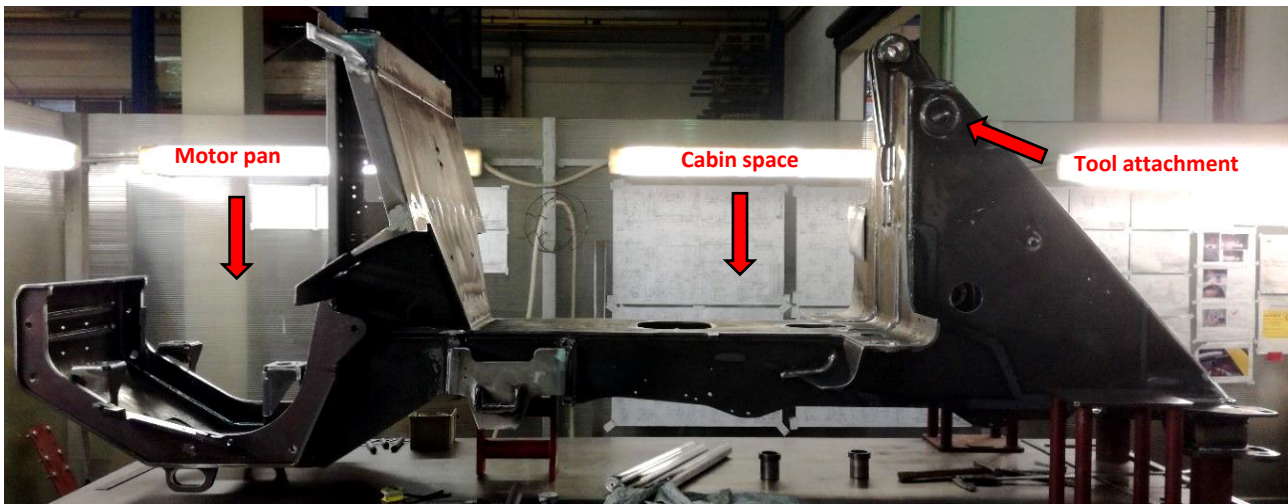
Wheel loader chassis weld [Hofrova 2018]
